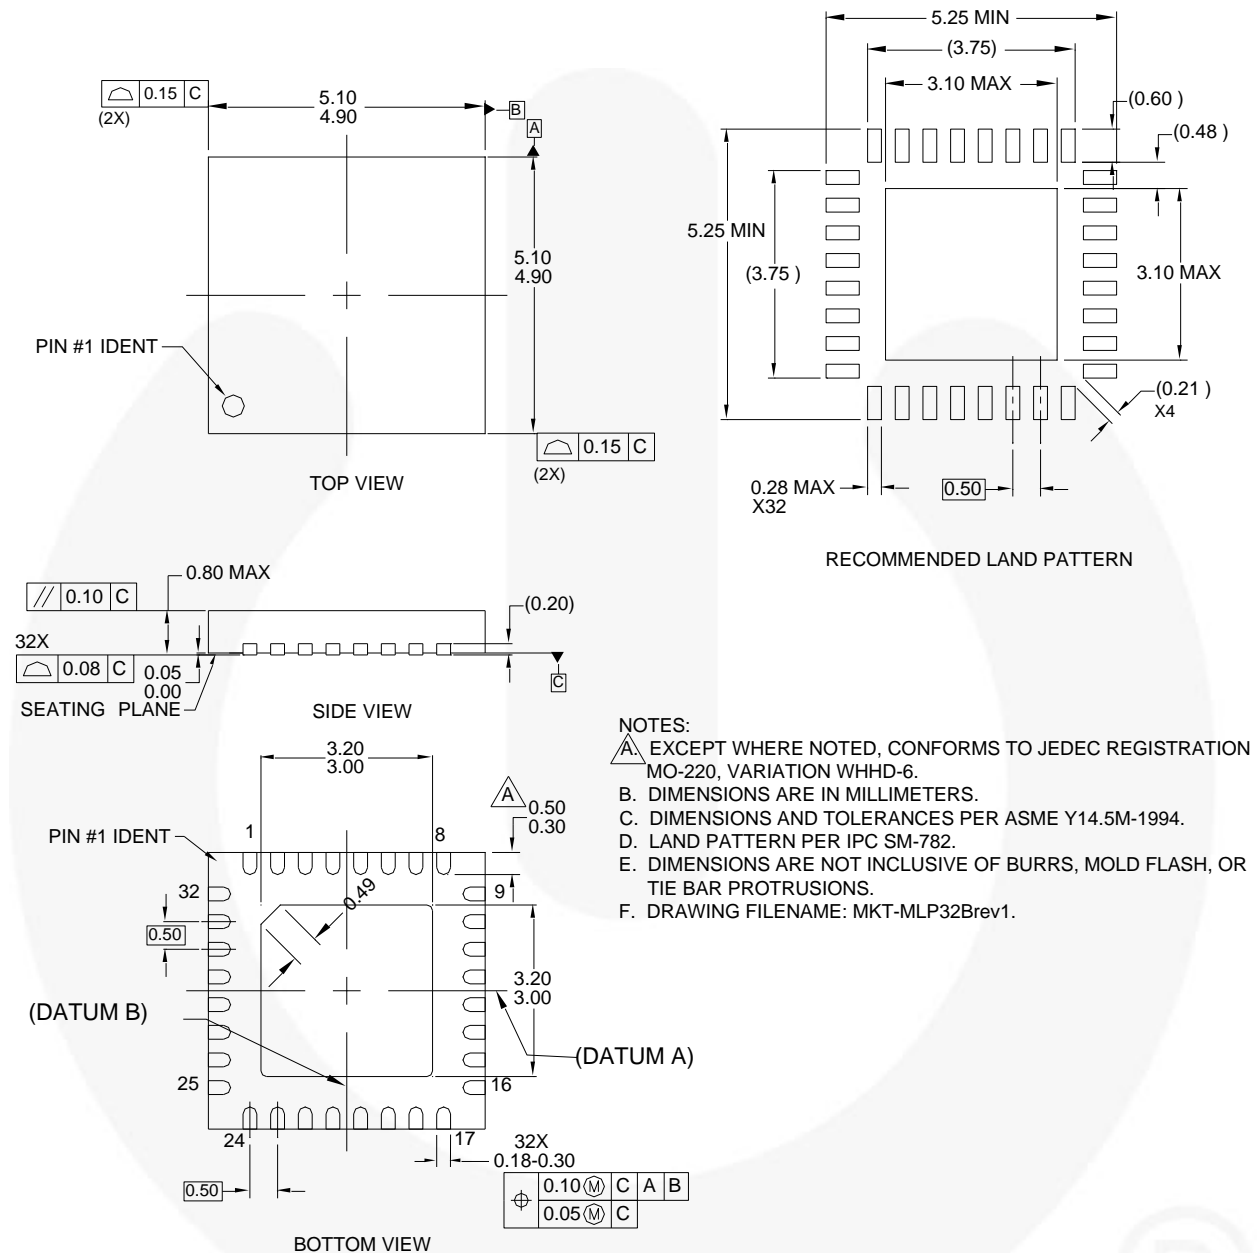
32-Lead, Molded Leadless Package (MLP)
